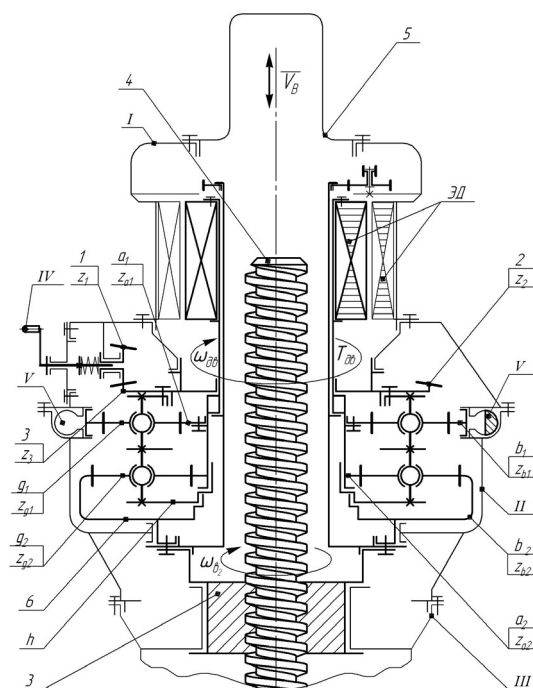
Kinematic scheme of multi-turn and multi-threading electric drive with an input on small central wheel and coaxially positioned towards axis of rotation of motor rotor, input and output shafts of reducing gears with axis of movement of valve spindle
